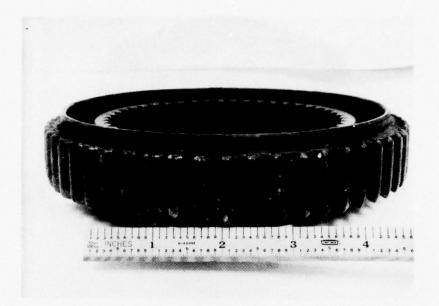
Lower sun gear after 25-minute loss-of-lube test of optimized transmission configuration number 1.
